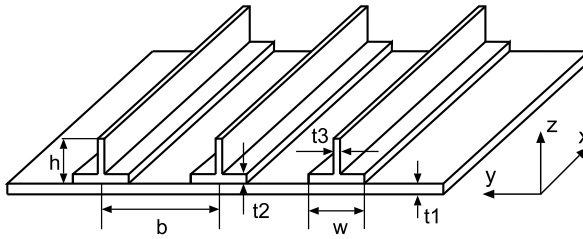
Stiffened aircraft wing skin. The stringers are constructed with beam elements, and the skin is constructed with shell elements
